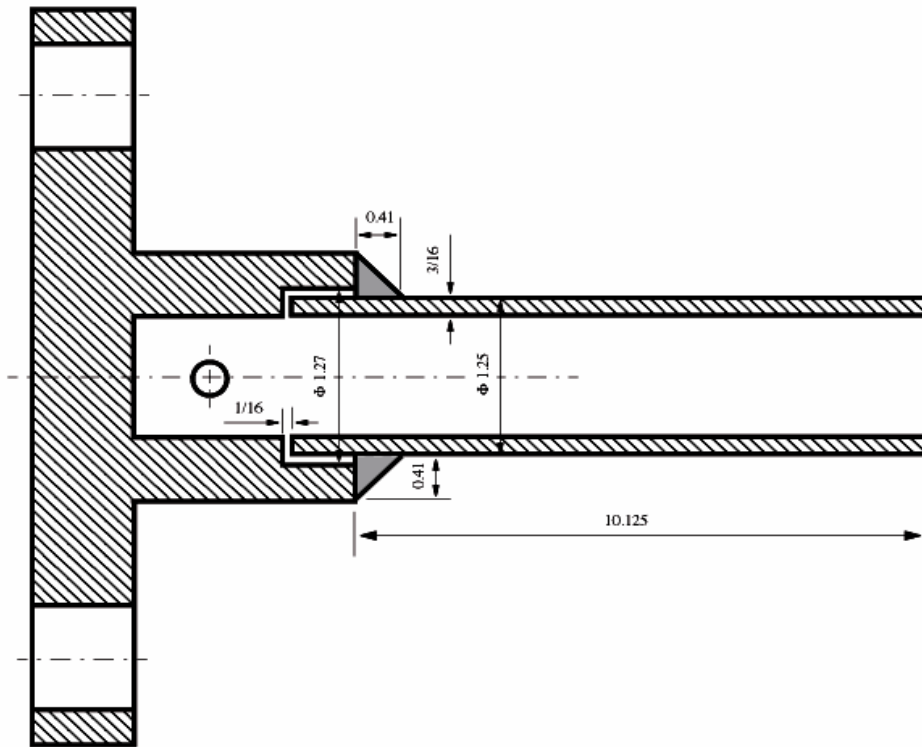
Geometry of socket-welded specimen (1 in = 25.4 mm) (Lu [2003])
